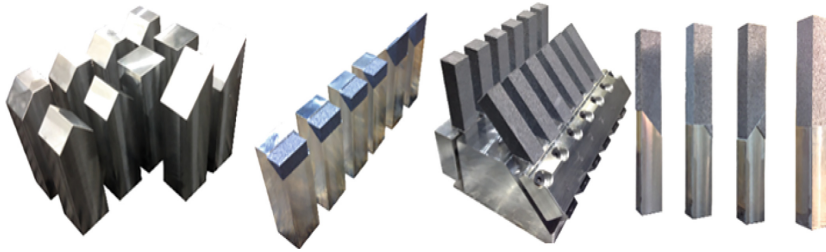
Specimens building steps. (a) cast part, (b) First stage, (c) Second stage, d. final model.
